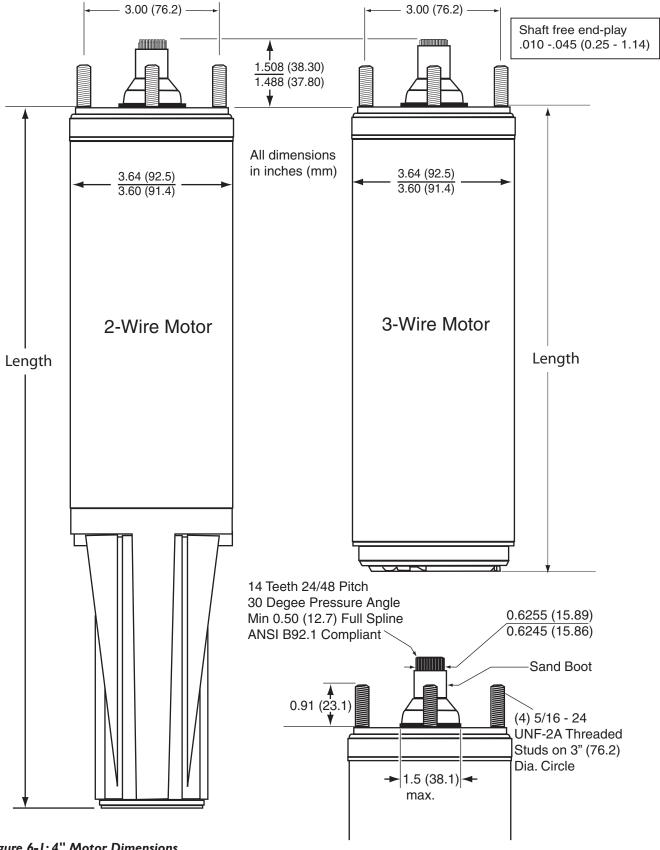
4" Motor Dimensions PN793 (Rev. 8/23/06)
